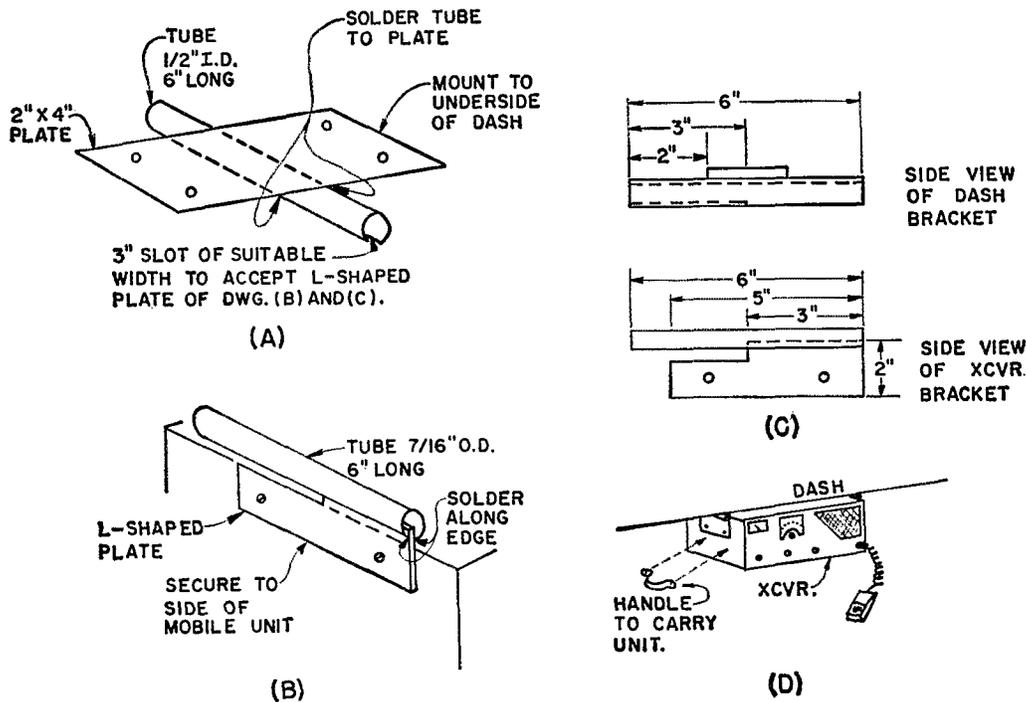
Details of the mobile mount. Four brackets are needed: two copies of the one shown in drawing A and two copies of the one shown in drawing B. Drawing C shows a side view of the bracket, and drawing D shows how a typical installation looks after a transceiver has been slid in place under the dash. For ease in soldering, copper or brass tubes and plates should be used to construct the mount.
